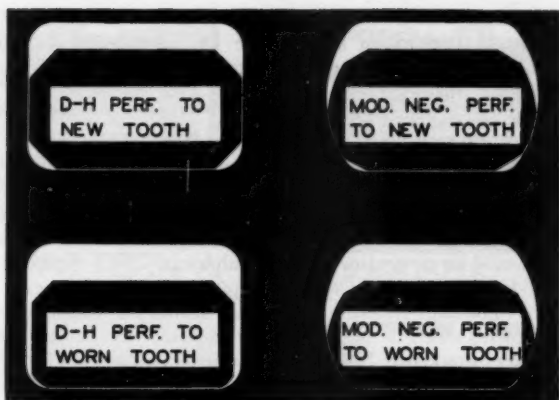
Drawing showing side clearance between perforation and guiding sprocket.
